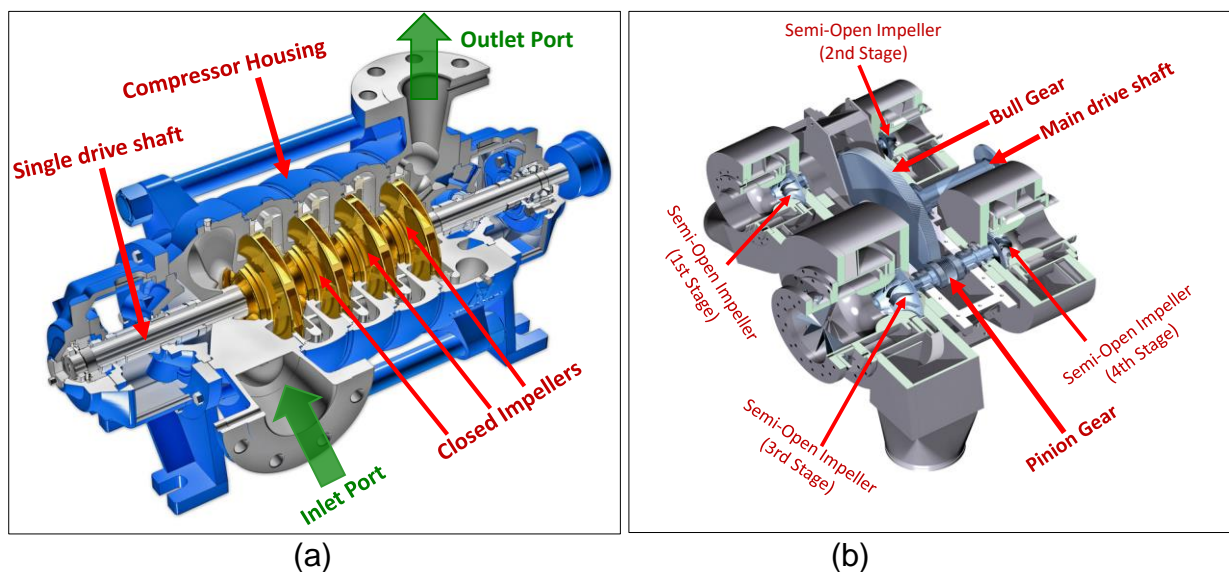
(a) In-line centrifugal compressor and (b) integrally geared centrifugal compressor
